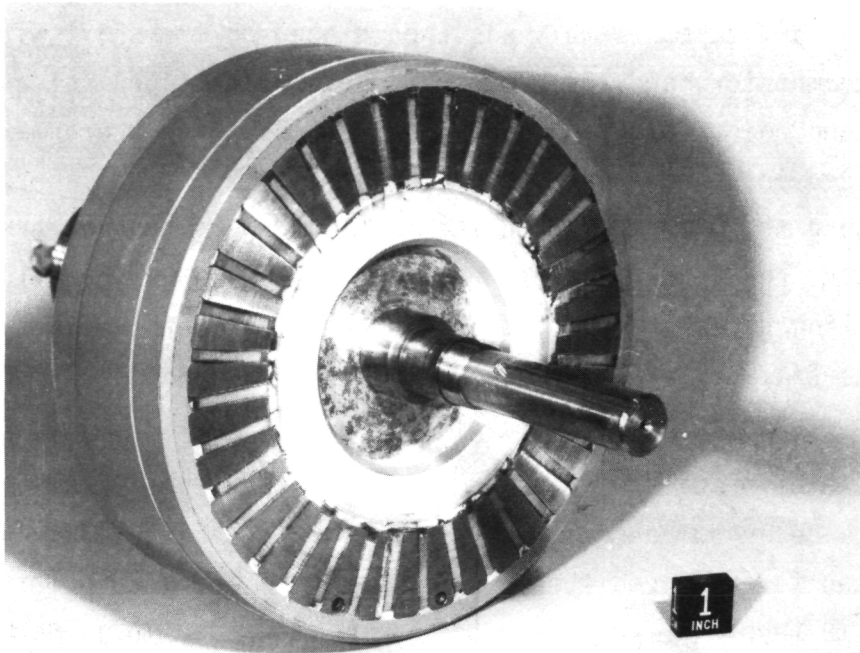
Engineering Model Rotor Assembly - Shaft End
